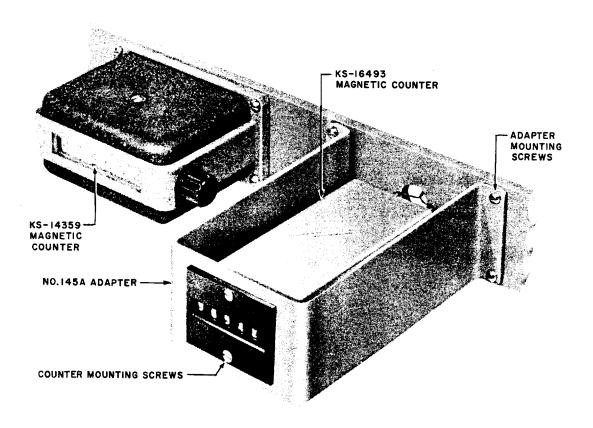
KS-16493 Magnetic Counter and No. 145A Adapter Mounted in Place of a KS-14359 Magnetic Counter
